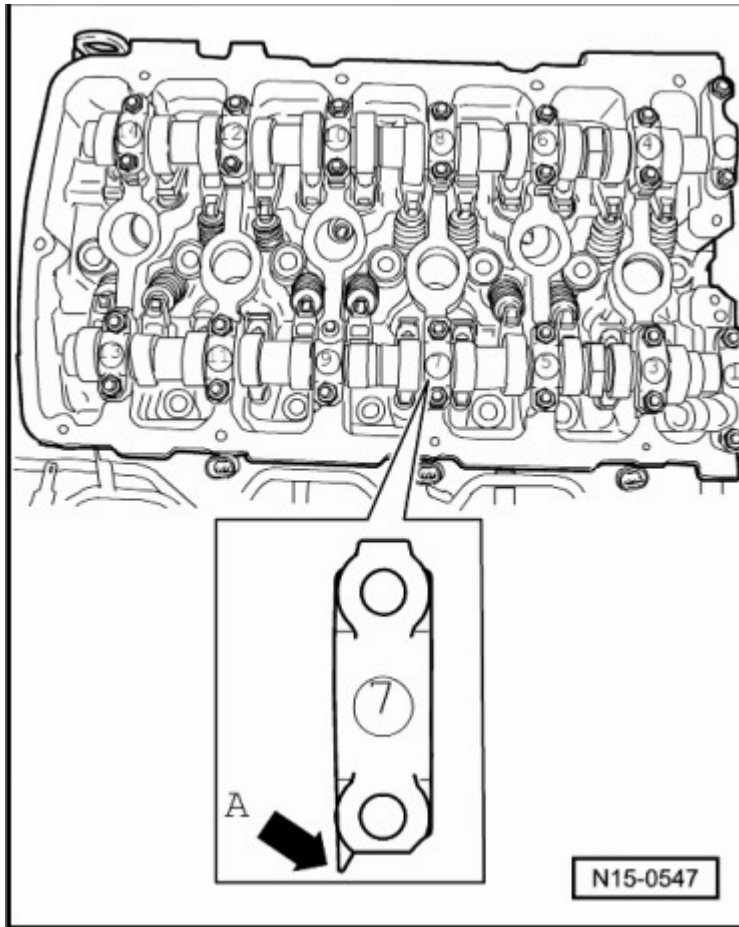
Identifying Points Of Intake And Exhaust Camshaft Bearing Cap Face Outwards
